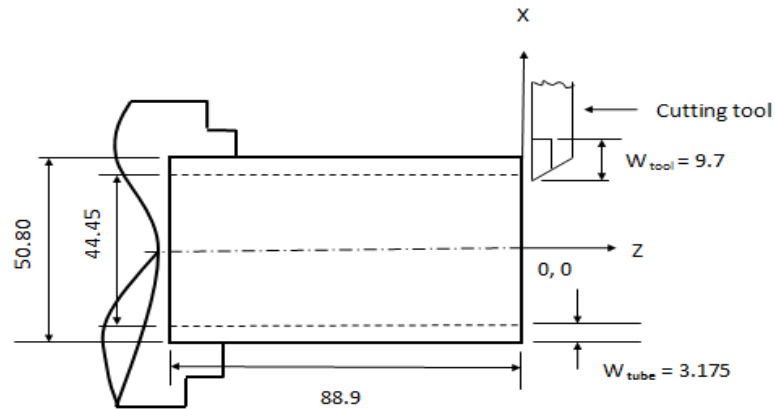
Titanium Alloy Tube Workpiece Clamped in the Lathe Chuck to Simulate Orthogonal Turning
